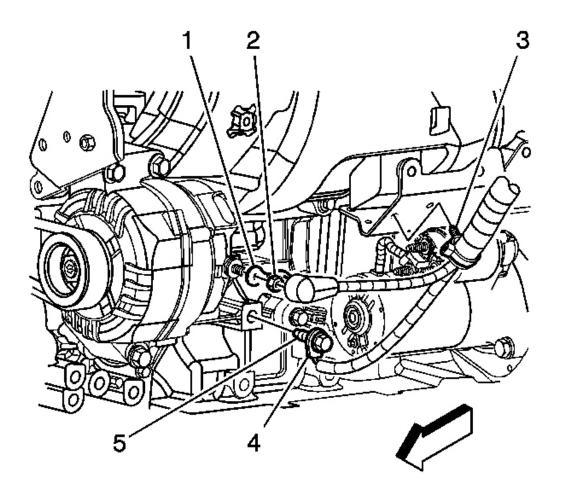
Starter Wiring Courtesy of GENERAL MOTORS CORP.
